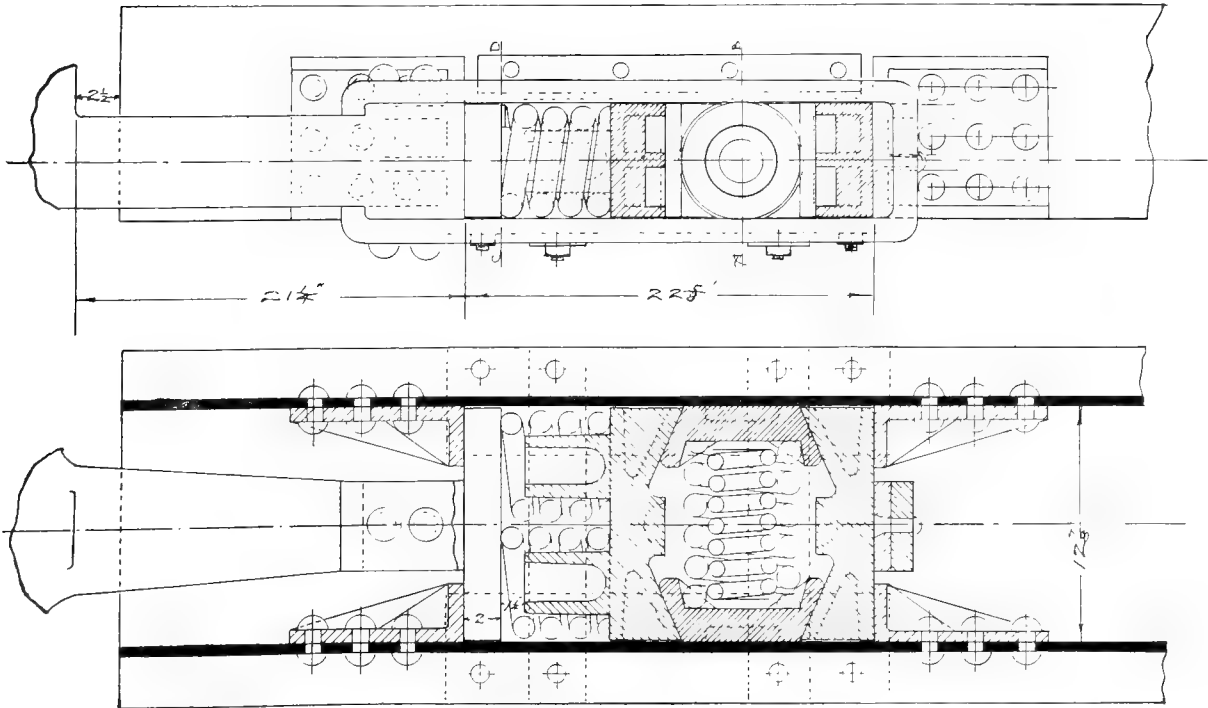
Butler Friction Draft Gear No. 370 Applied to Freight Car. Butler Drawbar Attachment Company.
